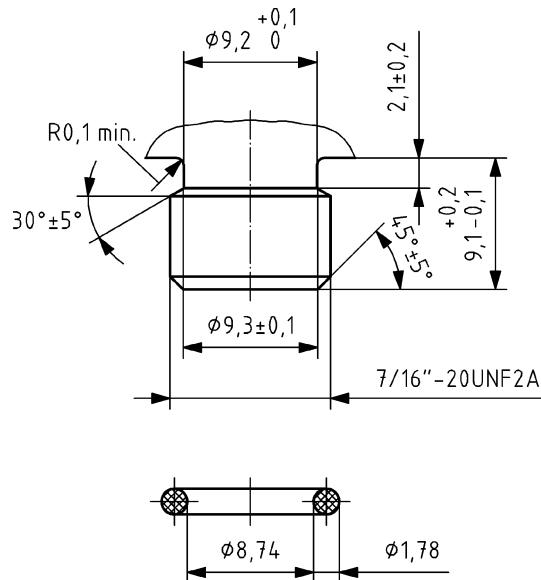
High-pressure male fitting, 7/16-20 thread, fitted with O-ring
